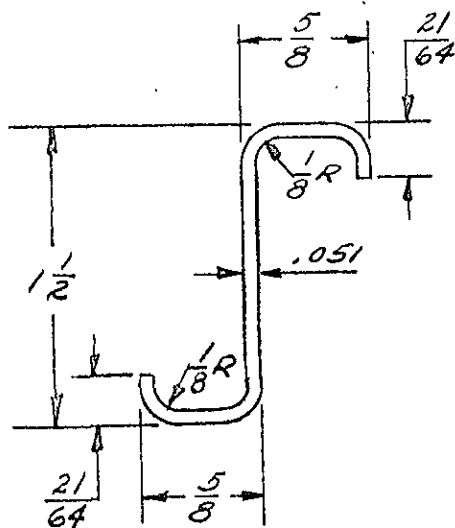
WING - SPAR - FRACTURE BETWEEN
